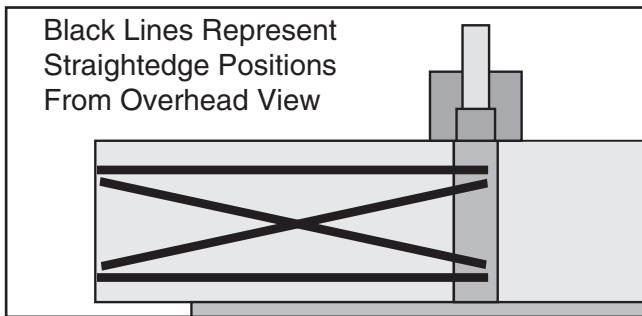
Straightedge positions for verifying if outfeed table is parallel with cutterhead.
